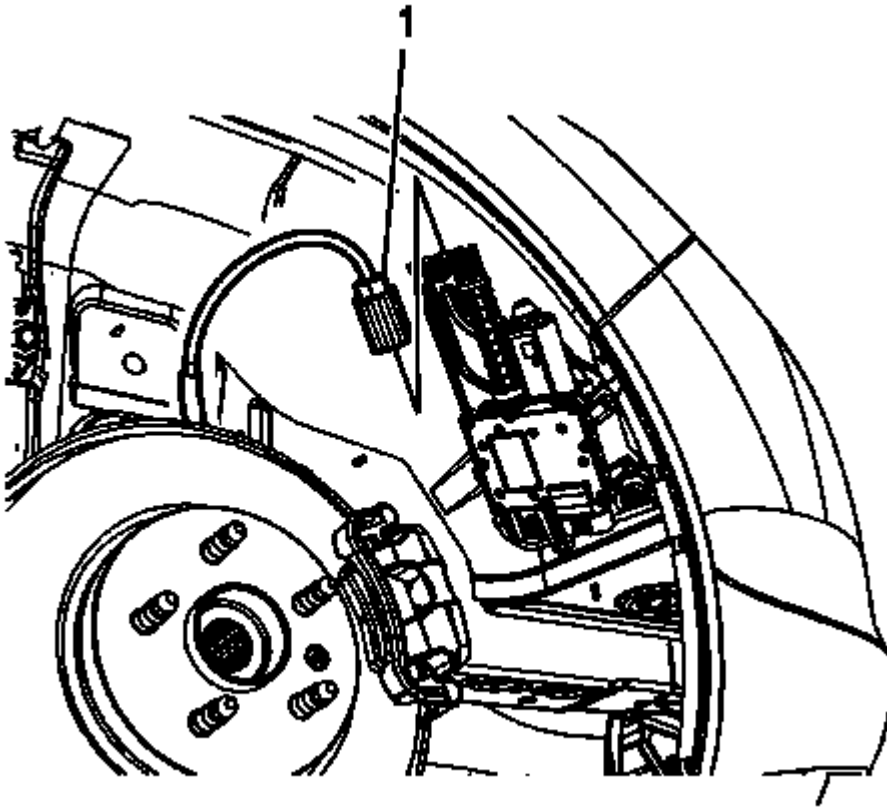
Rear Parking Brake Cable Nut And Electronic Parking Brake Control Module
